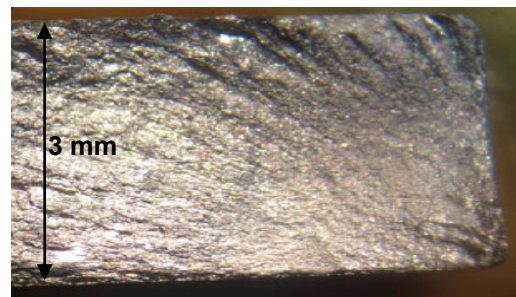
Fracture surface of specimen at stress of 280 MPa and 250°C
